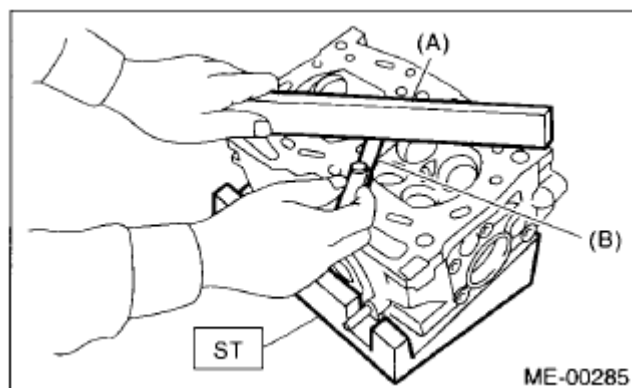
Measuring Warping Of Cylinder Head Surface Using Straight Edge
